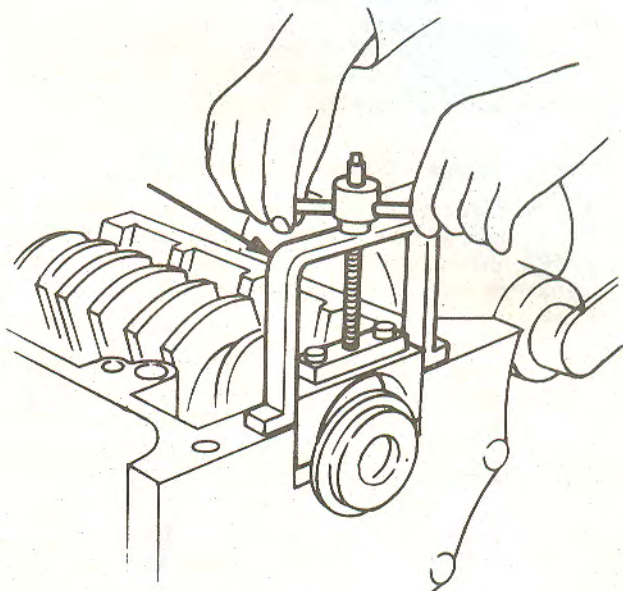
Removing the rear main bearing cap with the special puller. A similar puller can be made up if necessary.
